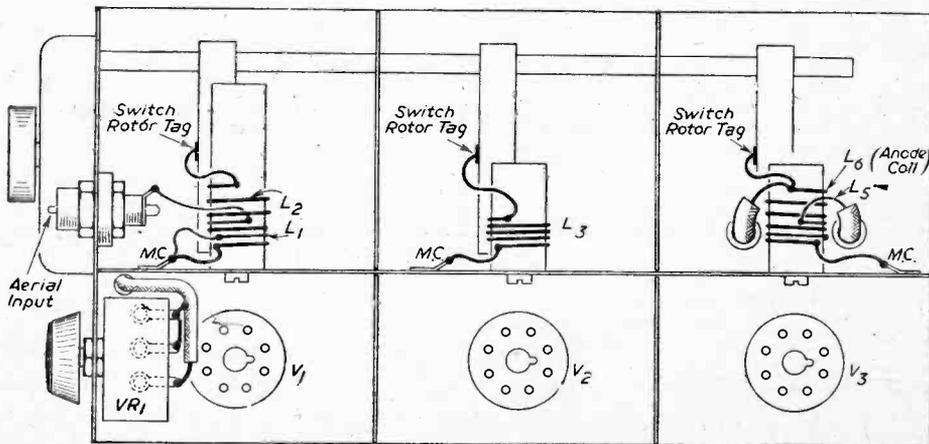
Top view, showing coil connections. The trimmers and fixed condenser have been omitted for clarity.
